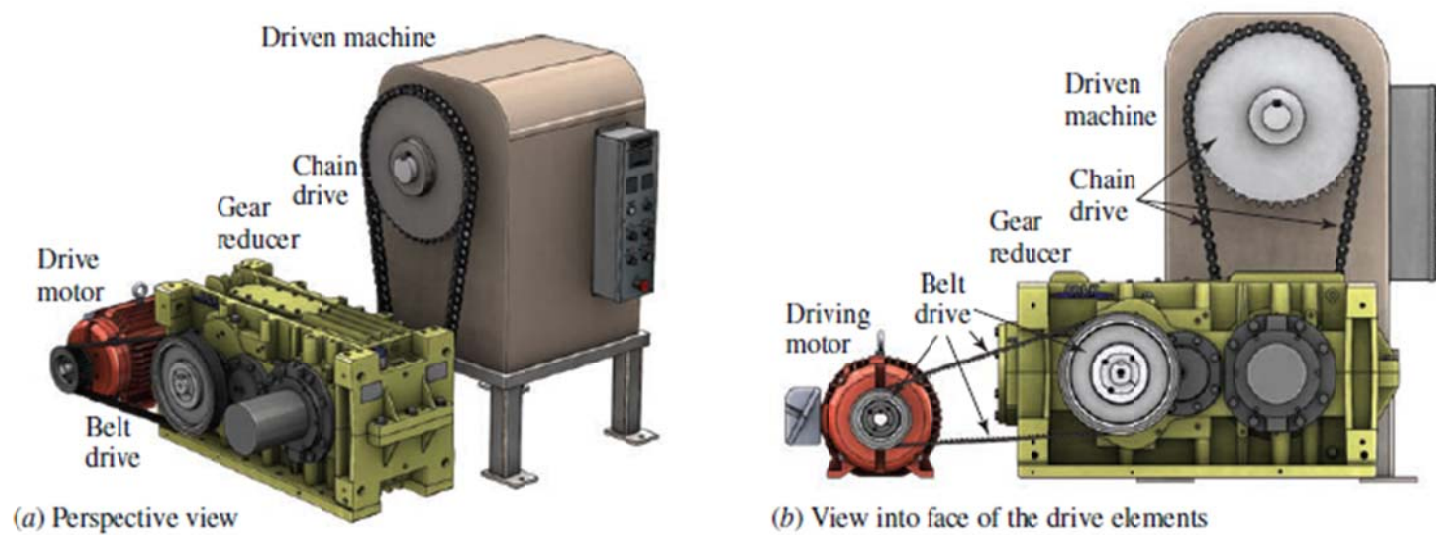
Drive system for an industrial application employing a belt drive, a gear reducer, and a chain drive
